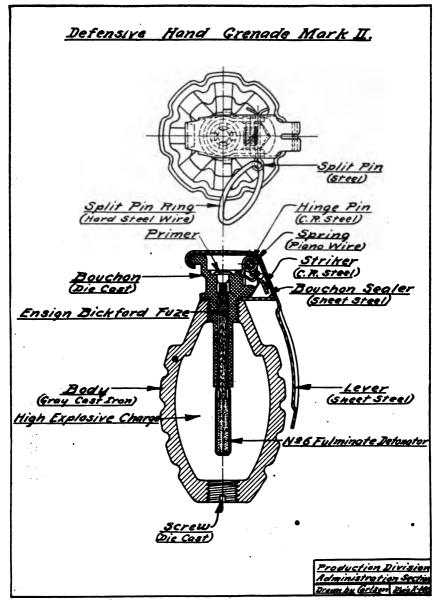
Sectional view of defensive hand grenade, Mark II.
